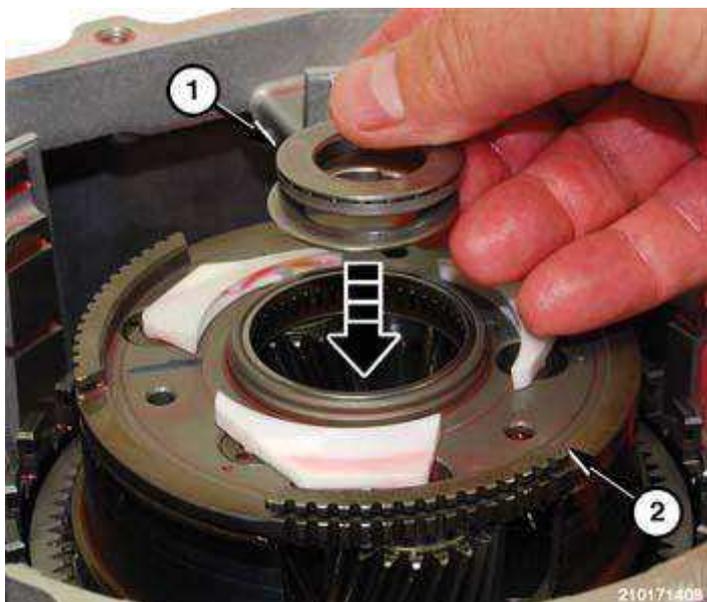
Thrust Bearing, Race Set & Middle/Rear Planetary Gear Assembly
